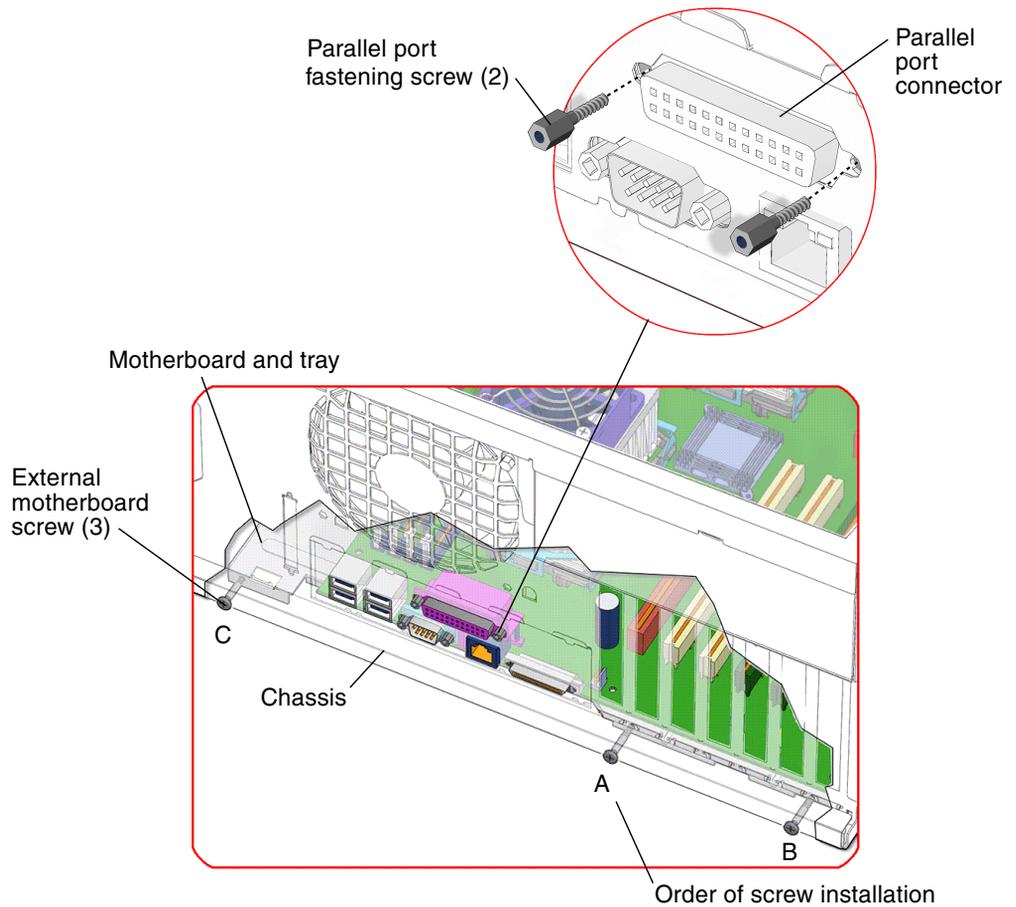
Installing the External Motherboard and Parallel Port Fastening Screws
